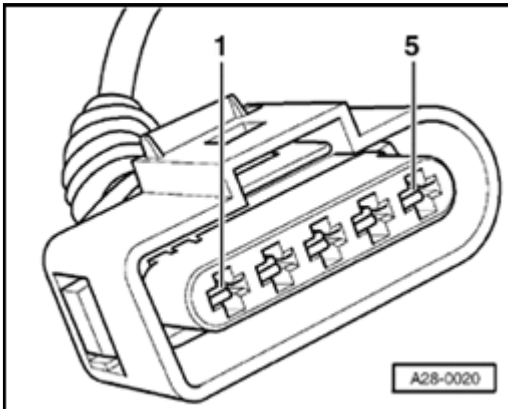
Identifying Engine Control Module (ECM) 5-pin Connector Terminals 1 & 5
